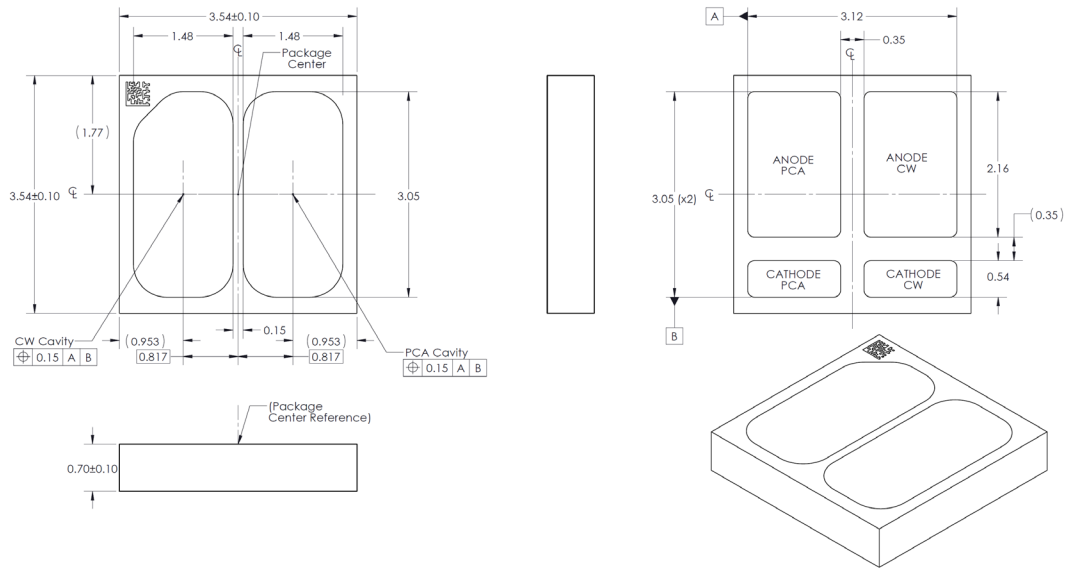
Mechanical dimensions for LUXEON Versat Dual Color CW/PCA
